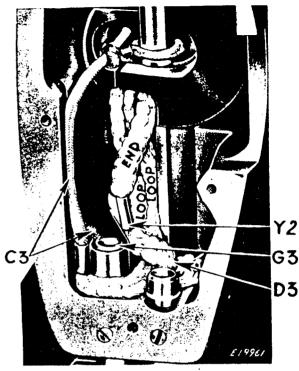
Location of Wicks in Head of Machine (Needle bar removed for purposes of clearer illustration, only)
